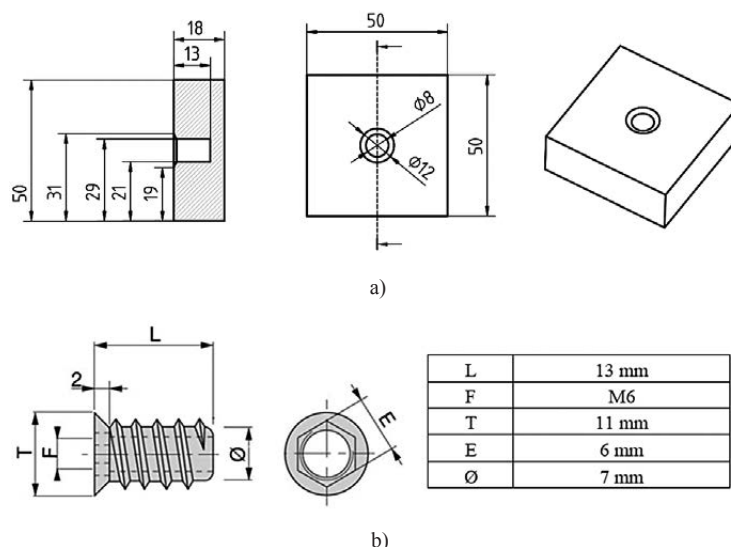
Geometry and dimensions: a) specimens for withdrawal capacity of double-threaded nuts testing, b) double-threaded nuts M6×13 (<https://www.lccshop.hr>; SKU: 008005)
